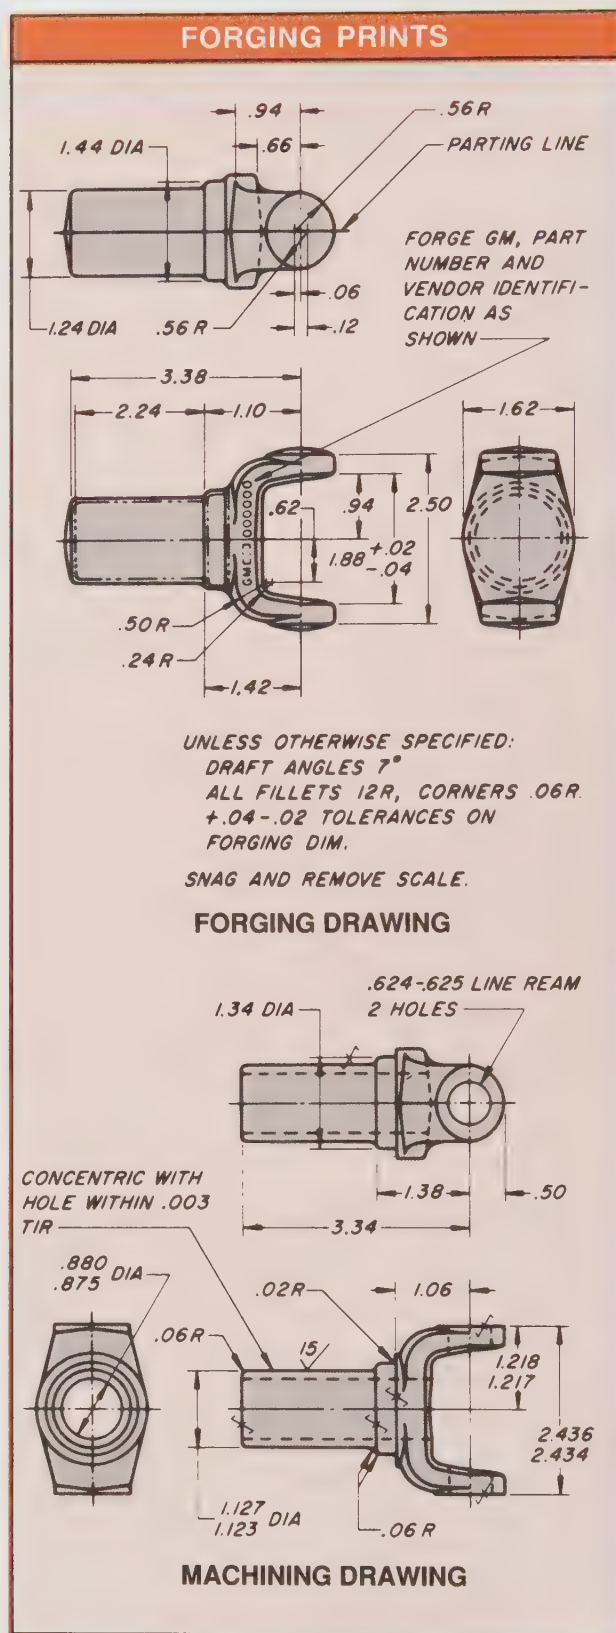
Forging prints show features forged into parts while the machining print shows finished detail.
